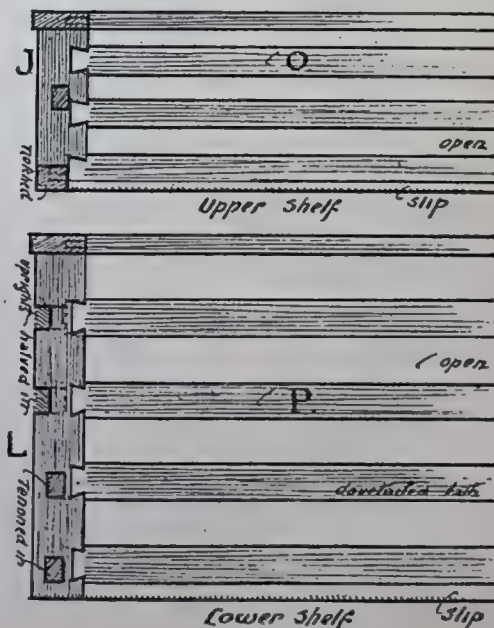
PART PLAN, SHOWING FITTING OF SHELVES.
